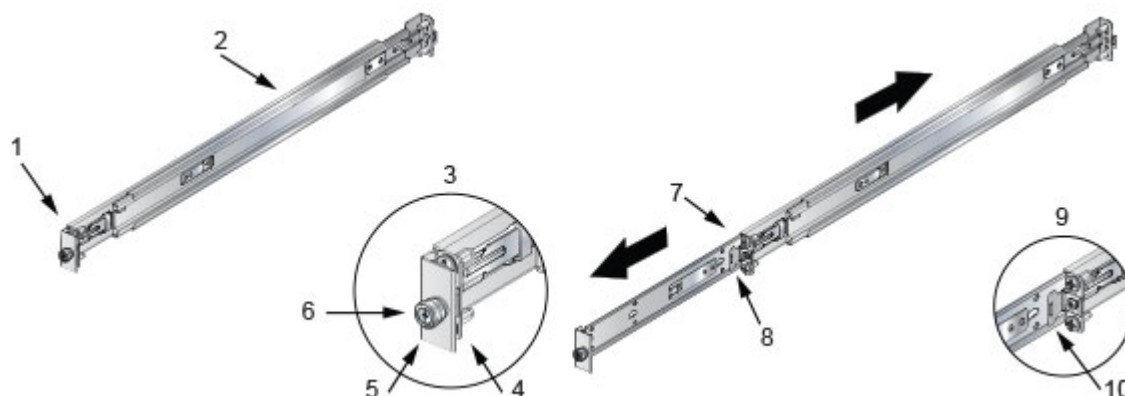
Bracket-Rail Assembly – Before and After Extraction
